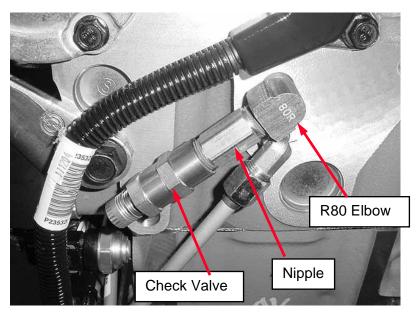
Former Check Valve, R80 Elbow, & Nipple
